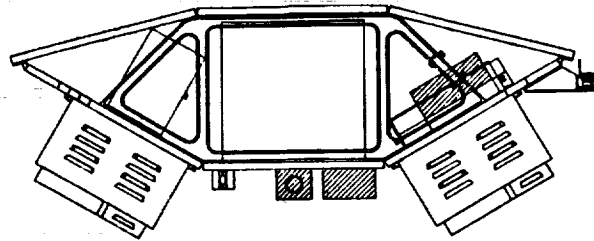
CSI-Star CAD Layout Drawing - Side View
